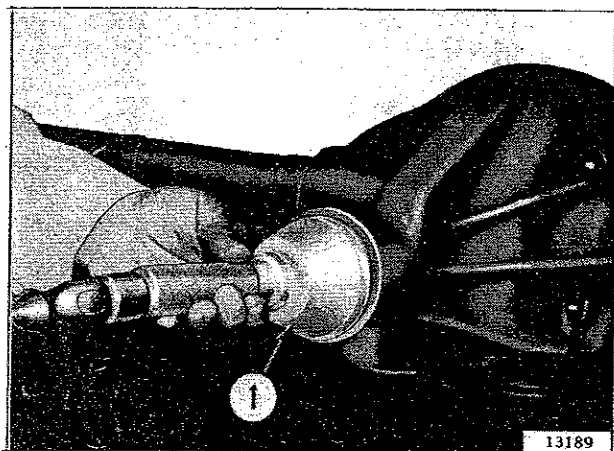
PINION SHAFT OIL SEAL INSTALLER
